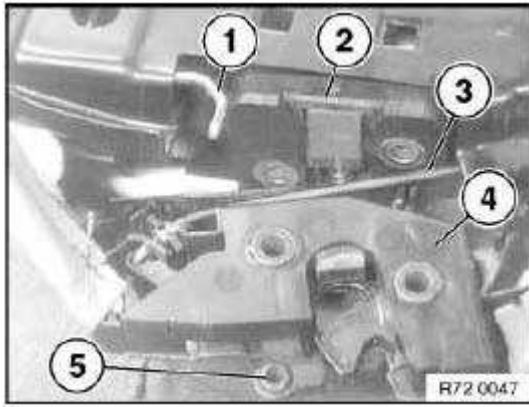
Actuating Rod, Bowden Cable And Backrest Lock
